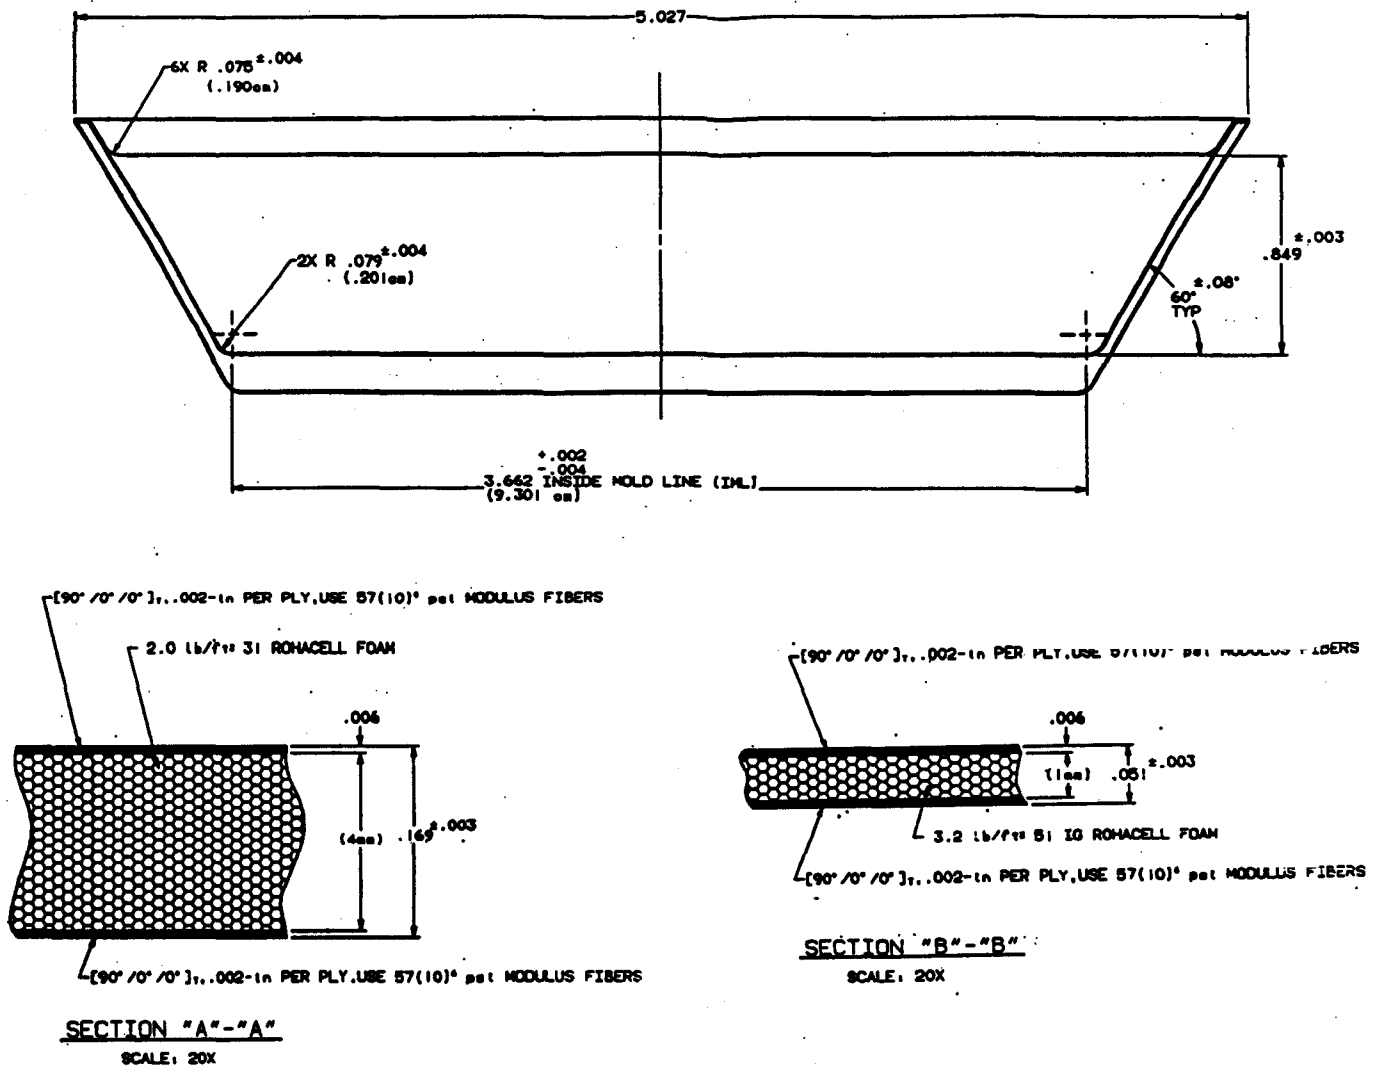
The cross section details for the full size prototype module, showing the Rohacell foam sandwich construction. A detail of foam construction is shown in the insert.
